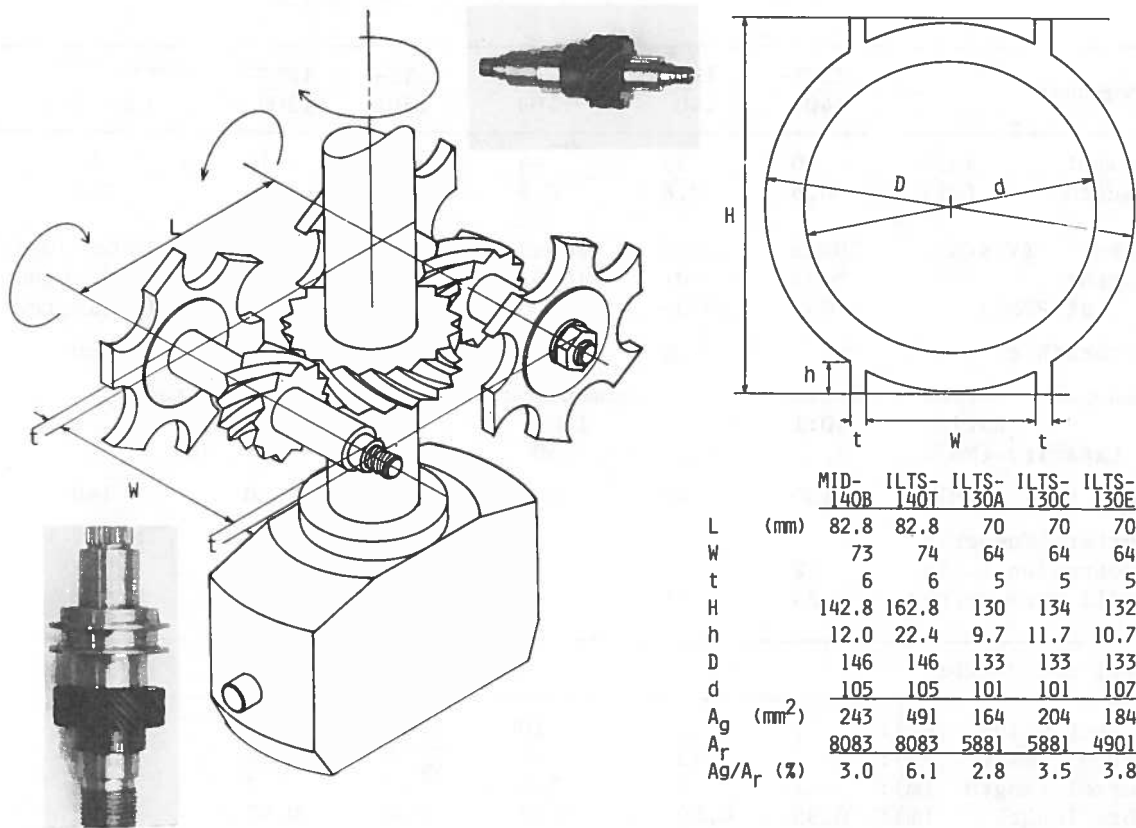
Drive mechanism for side cutters and the cross-section of the hole for the different drill series. A_g and A_r are the areas of the grooves and the annulus.
